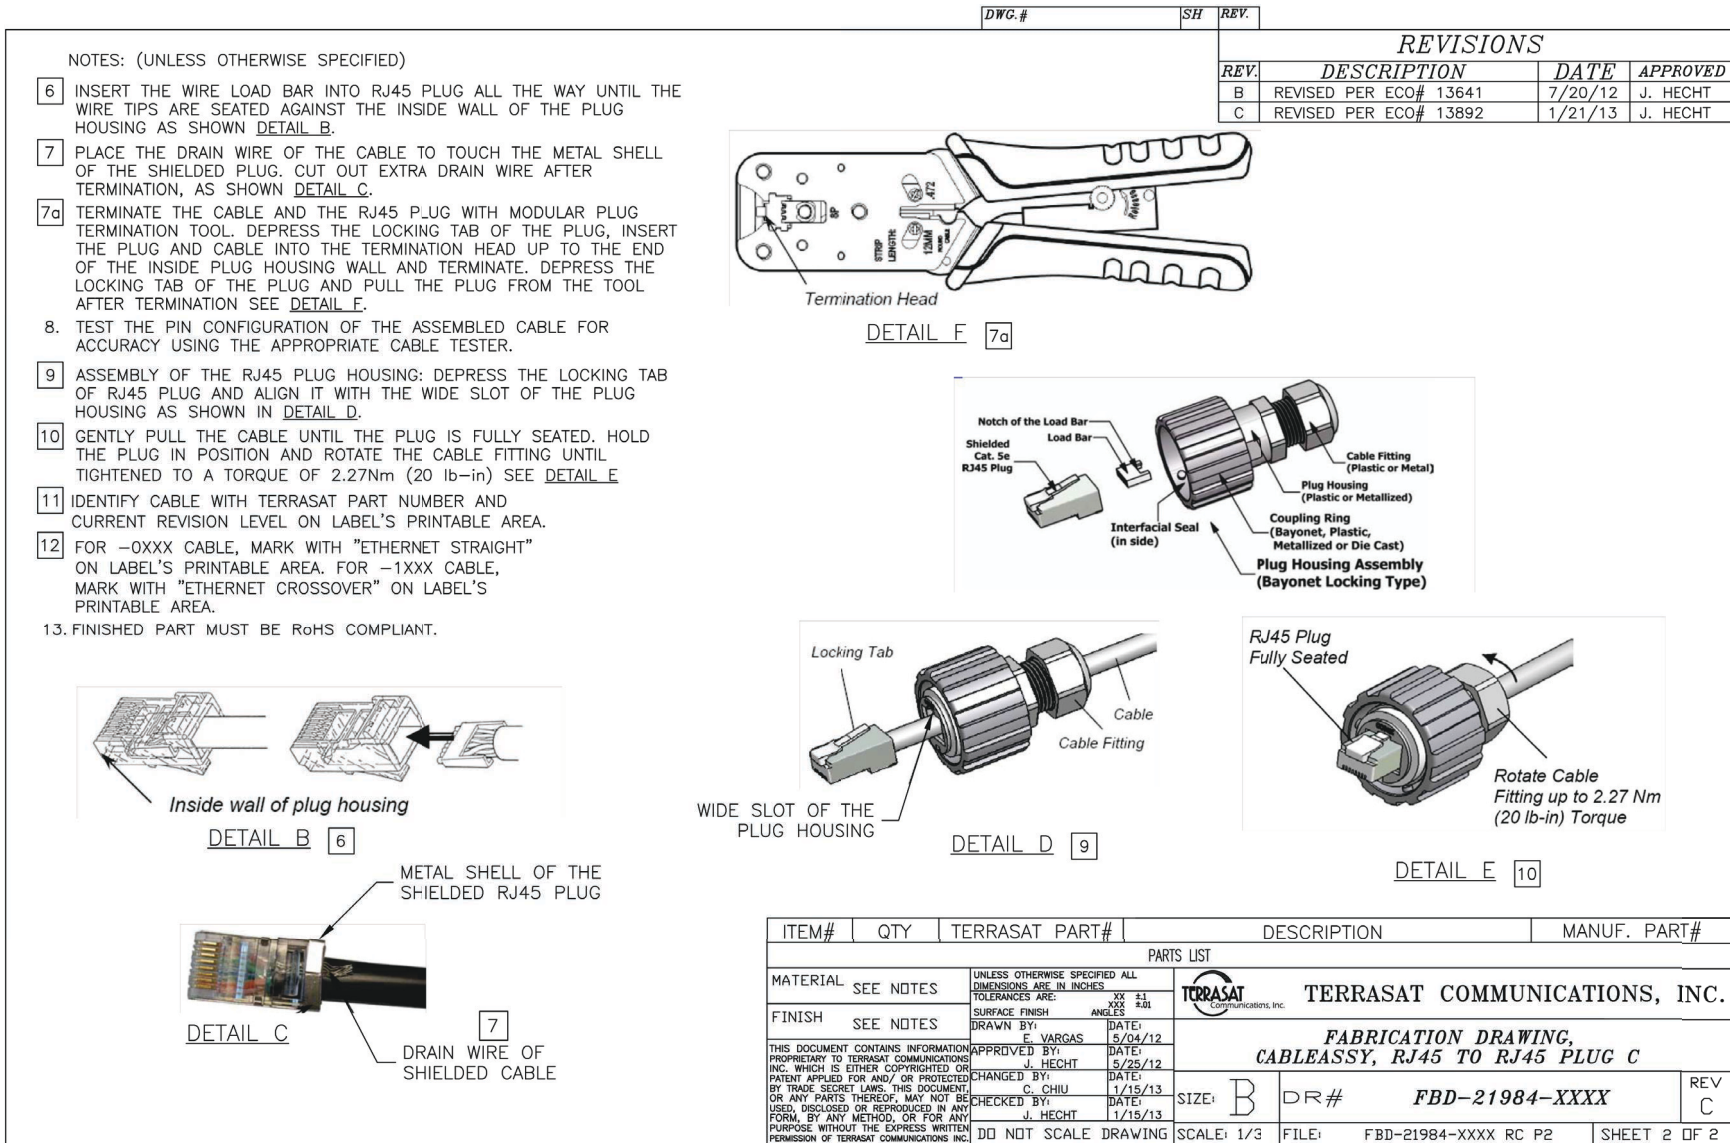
Fabrication Drawing, FBD-21984-XXXX, Rev C, page 2of 2
